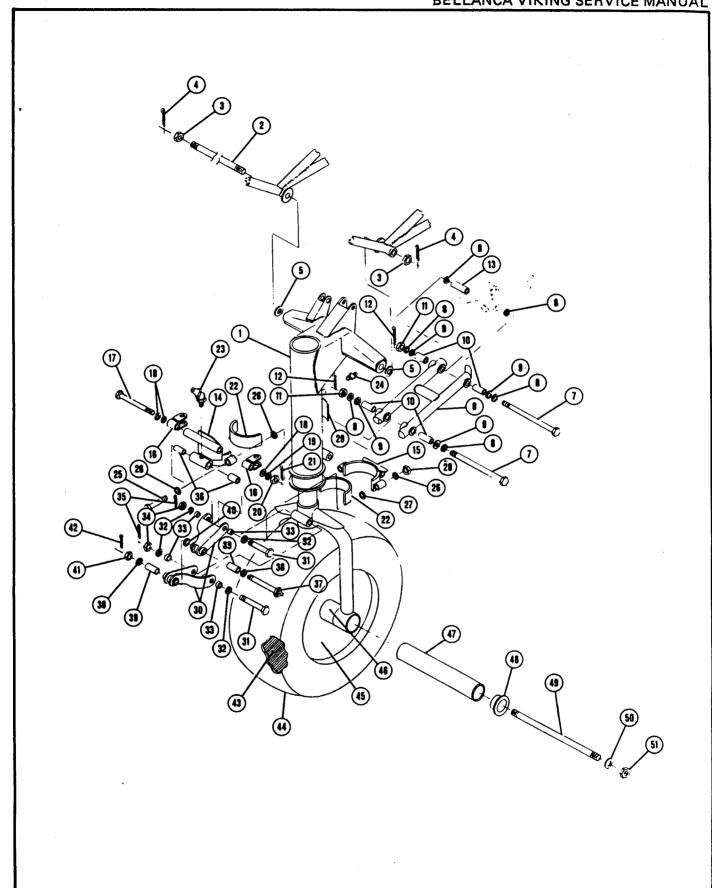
Nose Gear Installation, Aircraft Serial Numbers 75-30796 and below, and 32-15, 31004 and above.
